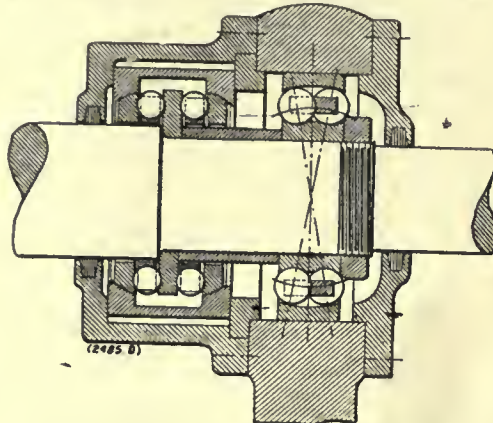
SECTION THROUGH COMBINATION THRUST AND RADIAL BEARING FITTING.
